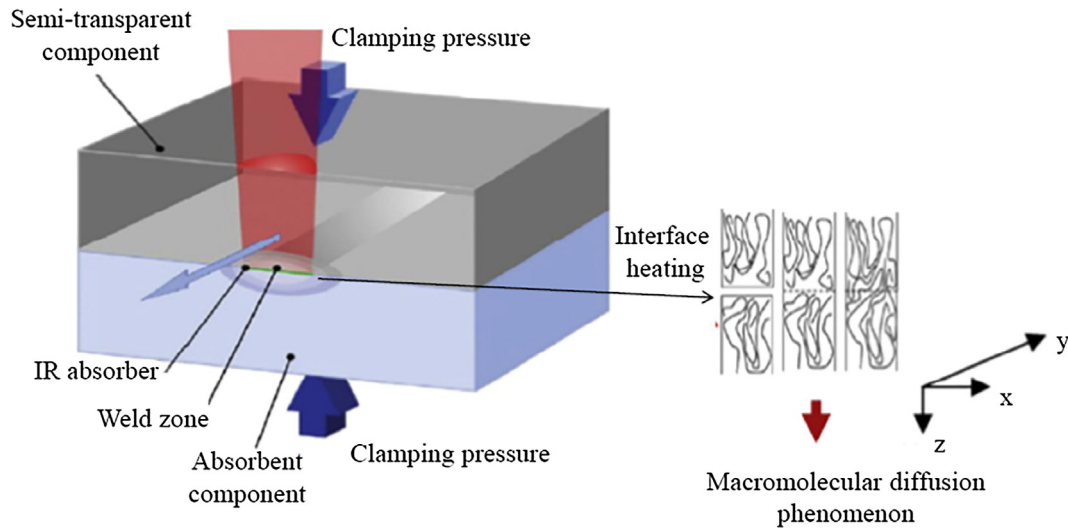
Through Transmission Laser Welding [6,7].
